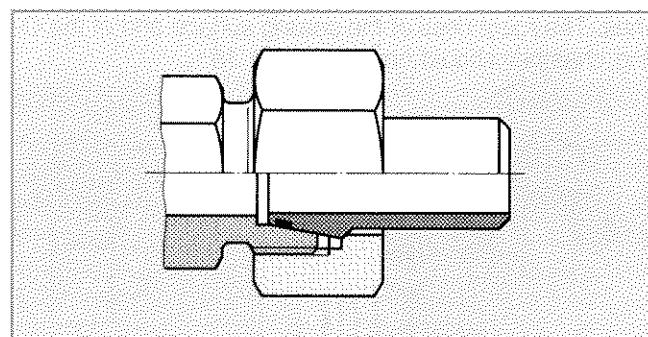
Welding-nipple threaded connector with taper to DIN 3865, elastic seal, securing function by welding
